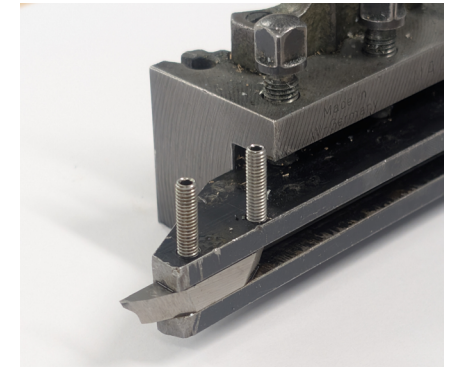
Special cutting tool developed by npk design specifically for this thread on the plunger.
